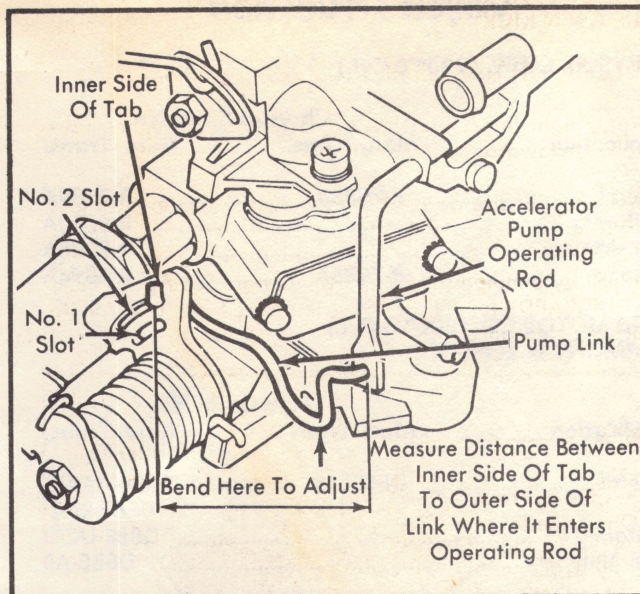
View Of Accelerator Pump Operating Link Showing Measurement Points (Ford)
